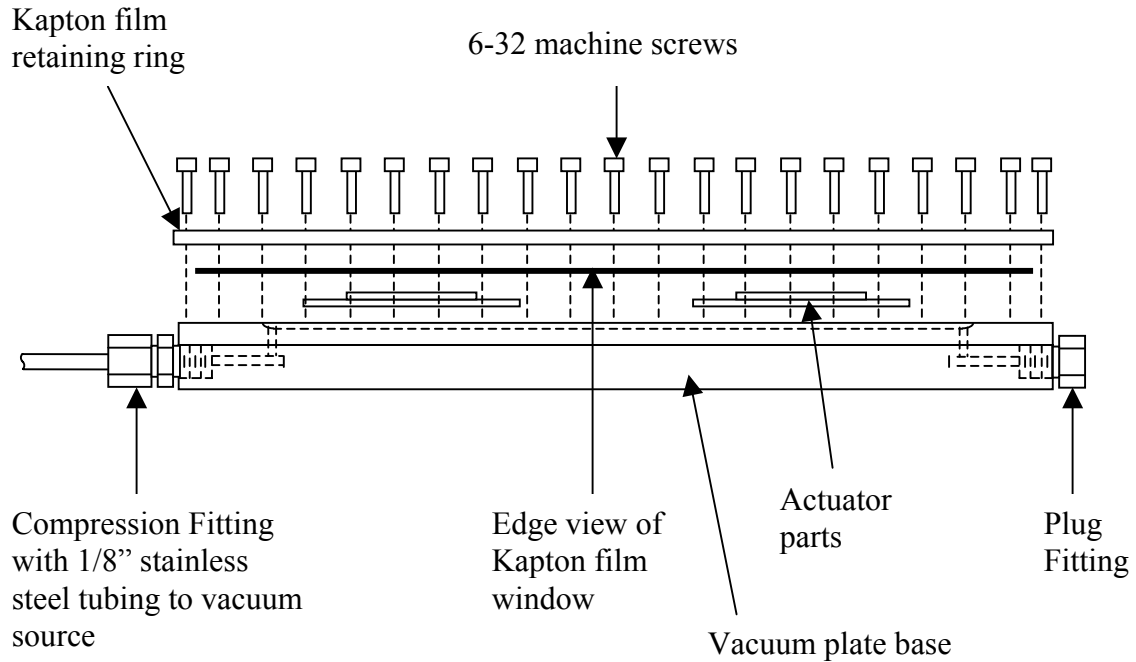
2. Exploded view: assembly of actuator parts and vacuum plate components. (Not shown: a lower layer of Kapton film beneath actuator parts which has slits to allow access to vacuum channel)
